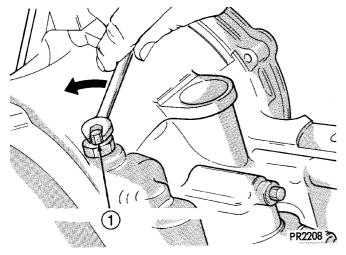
Kickdown Band Adjusting Screw 1 - KICKDOWN BAND ADJUSTING SCREW
